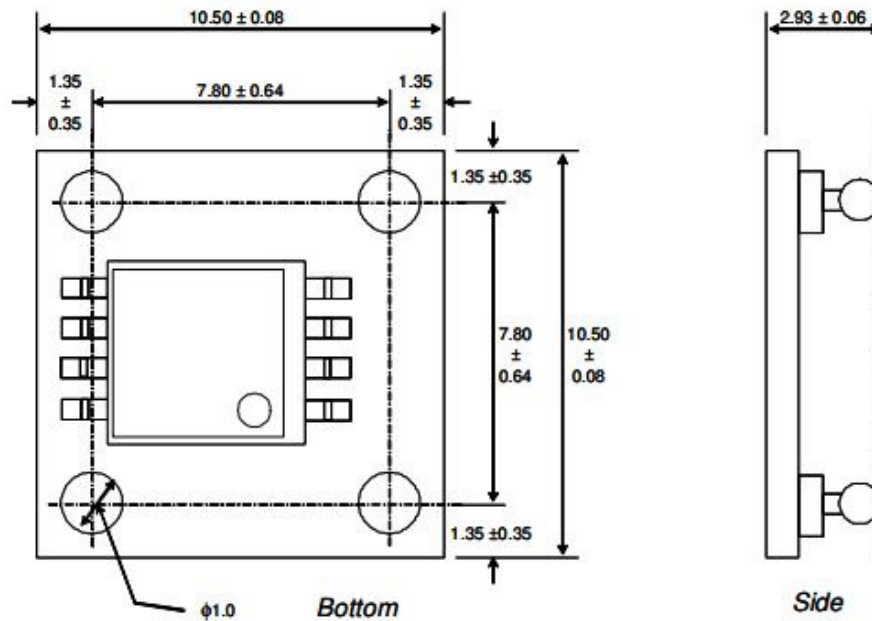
Mechanical Drawing (all dimensions are nominal and in mm)
